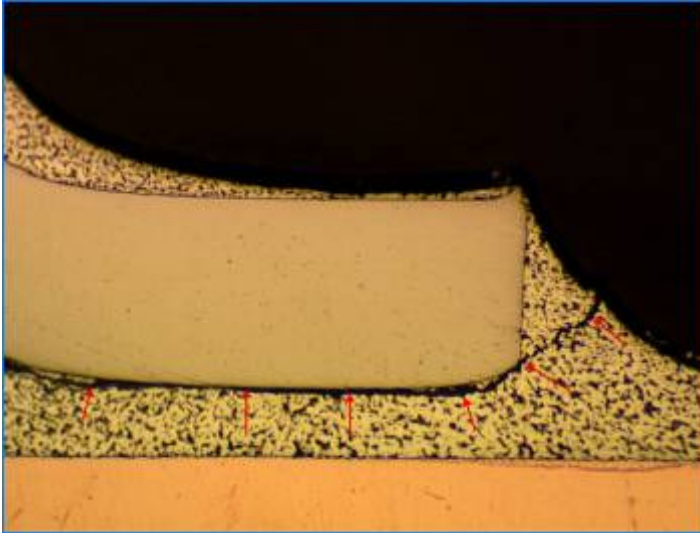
cross section, SN63, U61, right lead solder crack, 200xb
